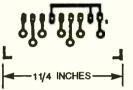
Use this full-size printed-circuit pattern to etch the display board for your Digital Humidity Gauge.
